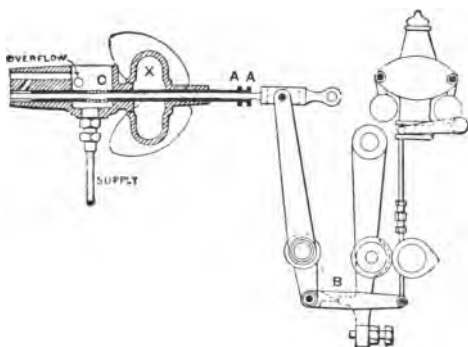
Arrangement of Oil Supply and Governor Gear of the Britannia Oil Engine.
